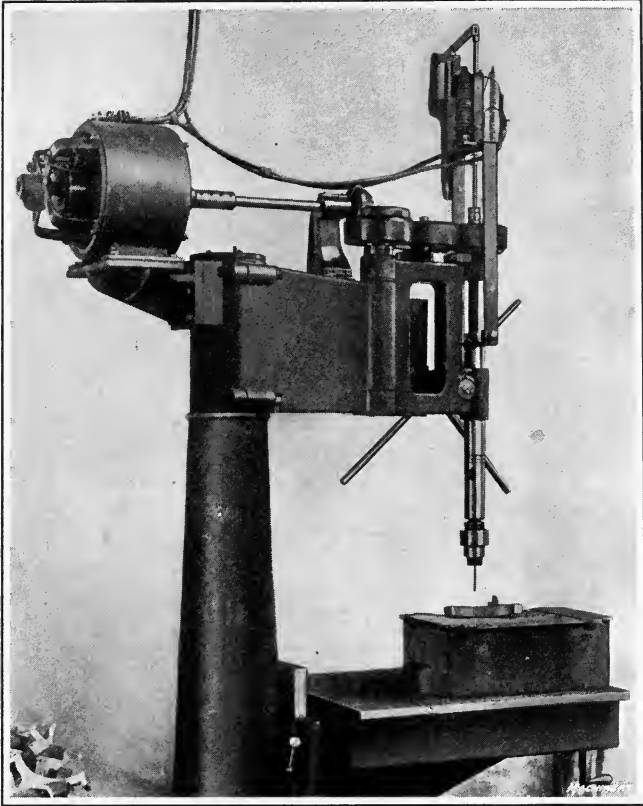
Radial Drilling Machine equipped with Automatic Control for Variable-speed Motor Drive to assure Proper Cutting Speed for all Tools
